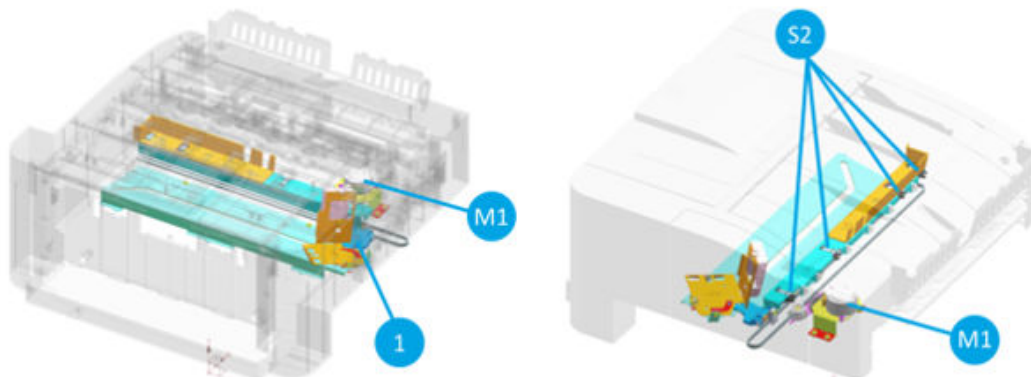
Inner finisher system - stapler unit detail view (1/2)
